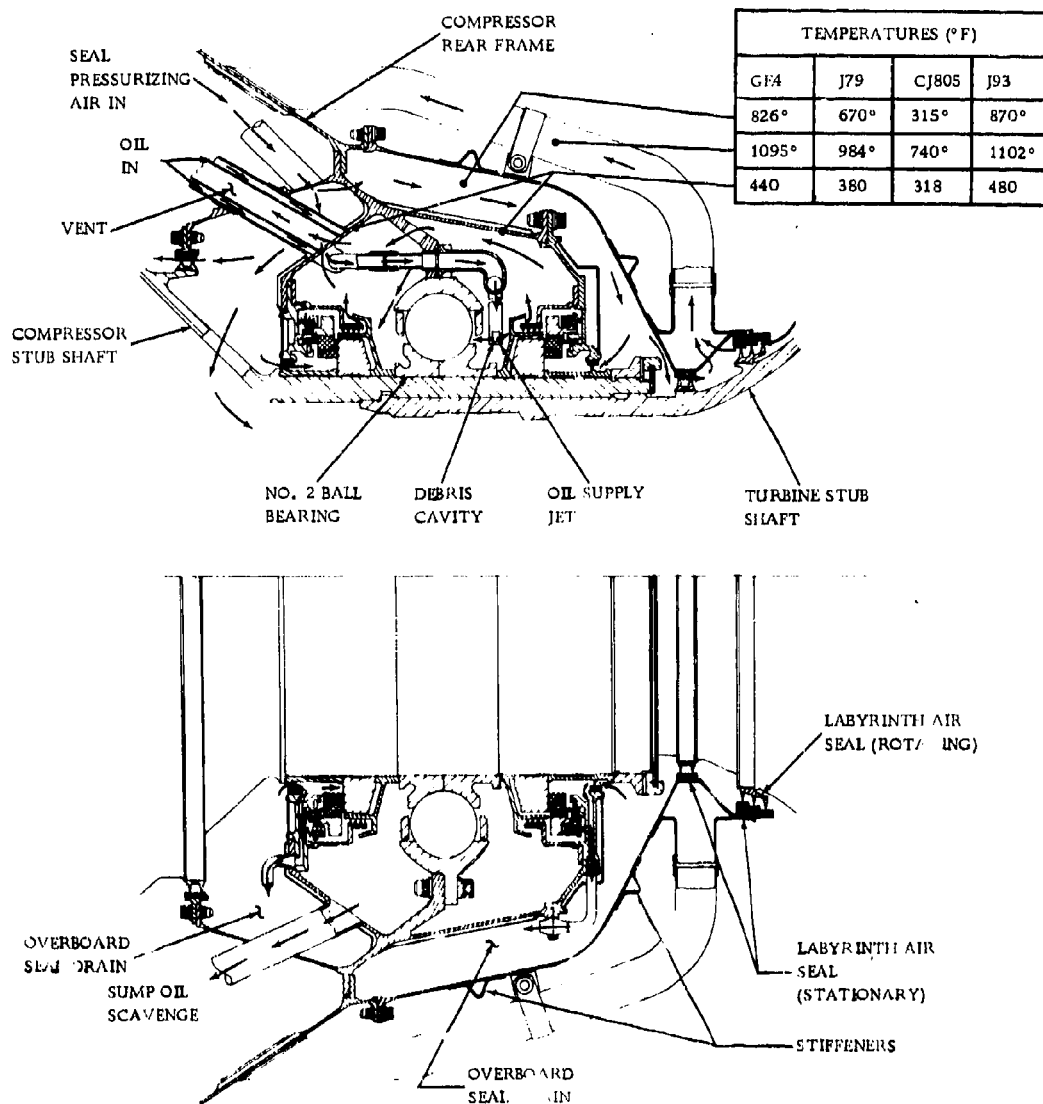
LAYOUT AND SCHEMATIC NO. 2 SUMP
